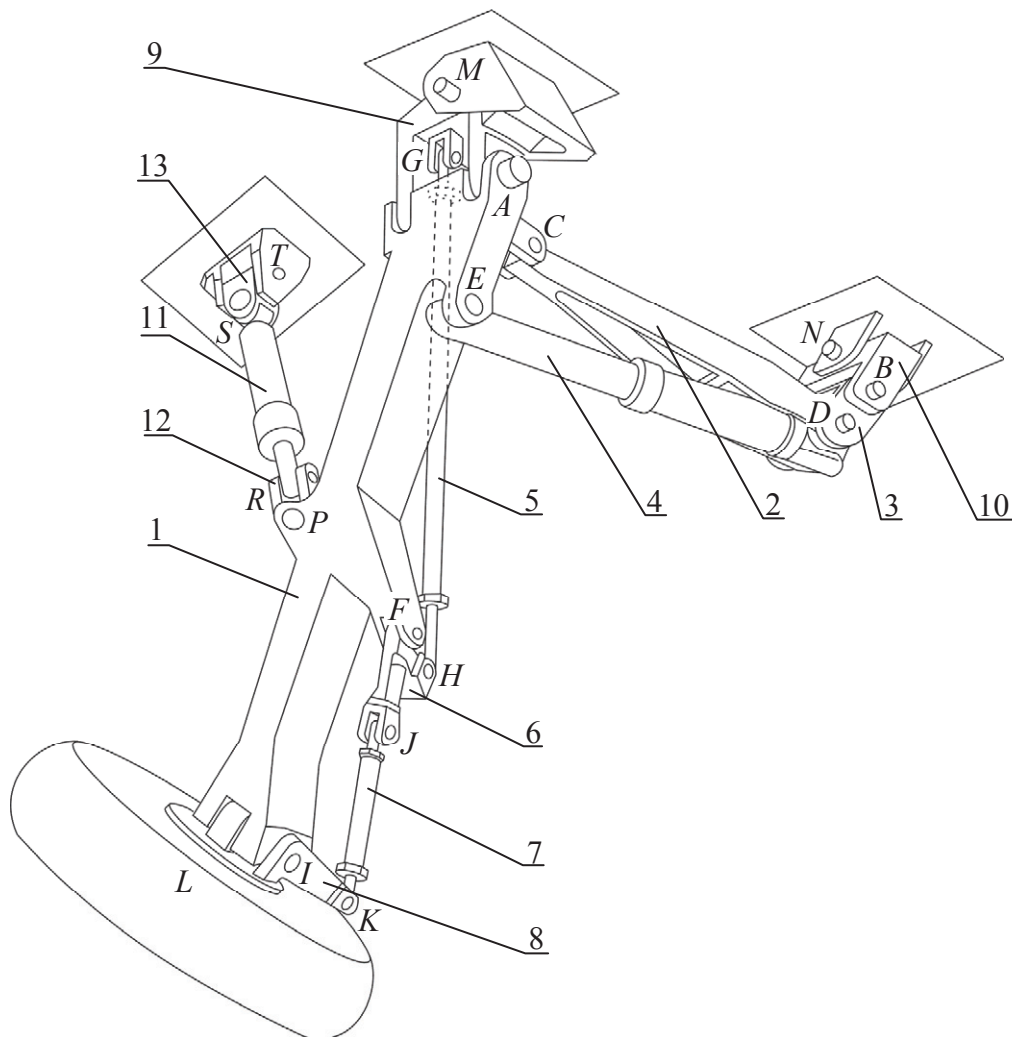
The mechanism of the Lockheed F-104S Starfighter landing gear
